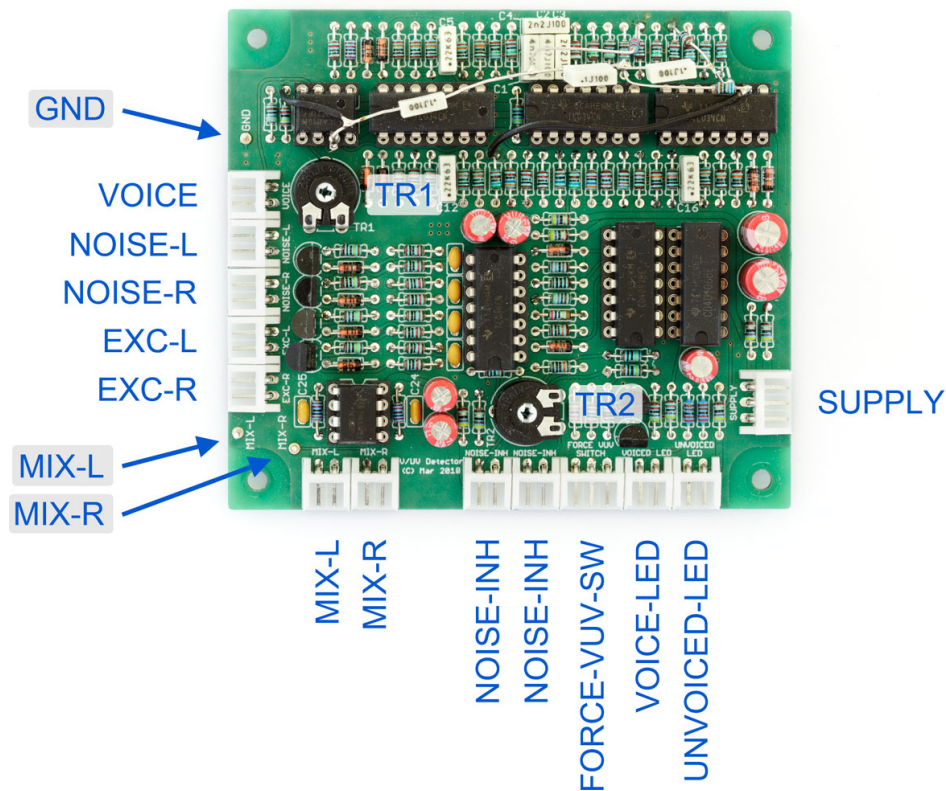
Voiced/unvoiced board with headers, trimmers and test pins. Note that this photo shows the prototype with minor last-minute tweaks. These tweaks are fully integrated in the final version of the PCB.
